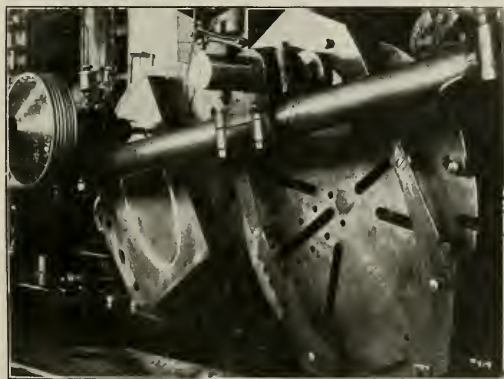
REDUCING MACHINE MILLING AN OVAL
